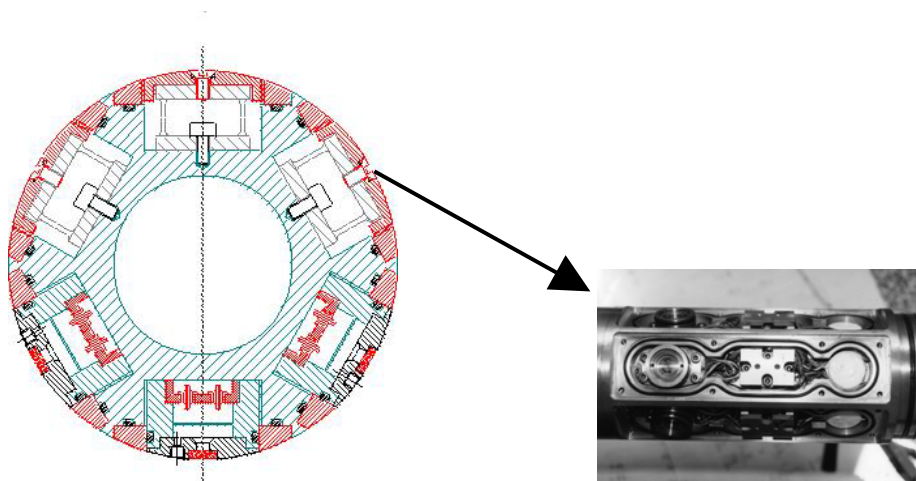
Cross-section of the LCPM (drawing and photo courtesy of Cambridge Insitu)
